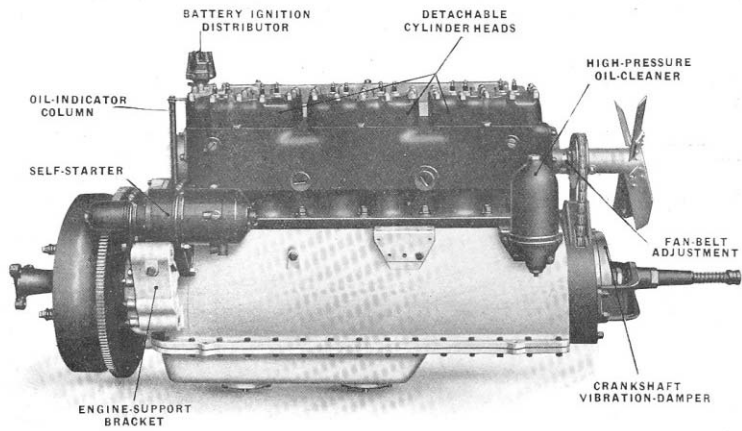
Off side of 6-cylinder Engine, complete, as fitted to 650/800 Gallon Fire Engine.
